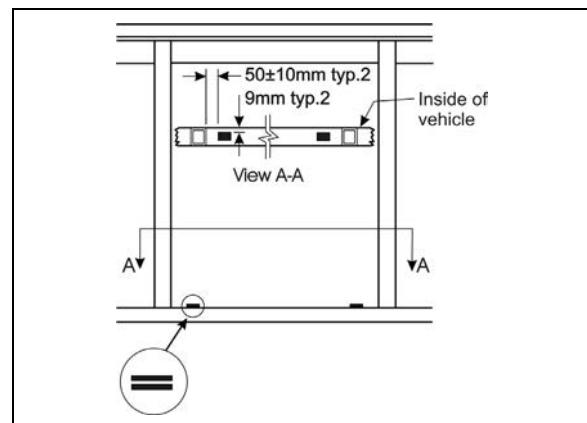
AWNING WINDOW - RUBBER BUMPER INSTALLATION
